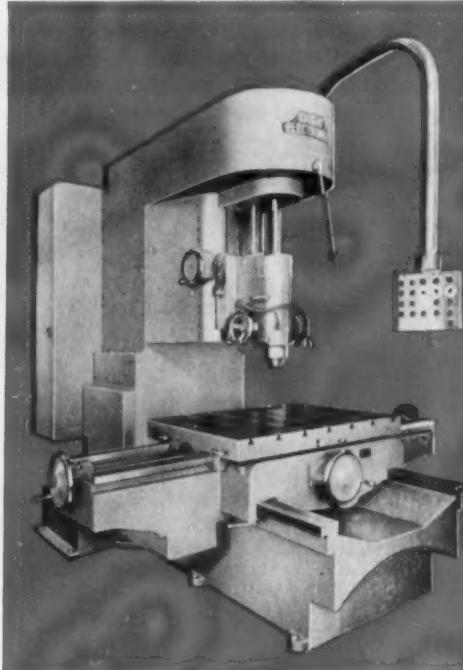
Fully assembled "Electromill" with 36 x 48-inch table which can be traversed both crosswise and in and out. The machine weighs 11 tons and can handle workpieces weighing up to $2\frac{1}{2}$ tons. The control panel can be swung to any convenient position.
